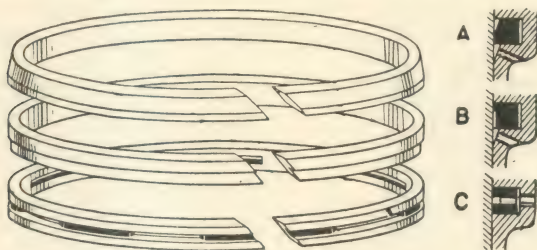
TYPES OF OIL SCRAPER RINGS (BRICO)
